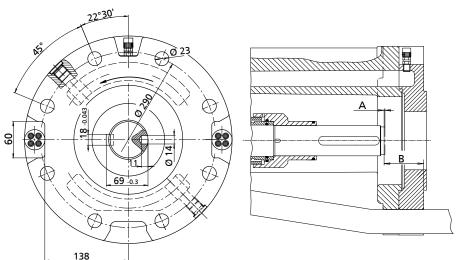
Mating dimensions 14D, dimensions in [mm]
